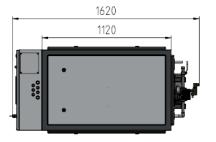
Dimensions and connections for Vitobloc 200 EM-6/15 CHP unit (dimensions in mm)
